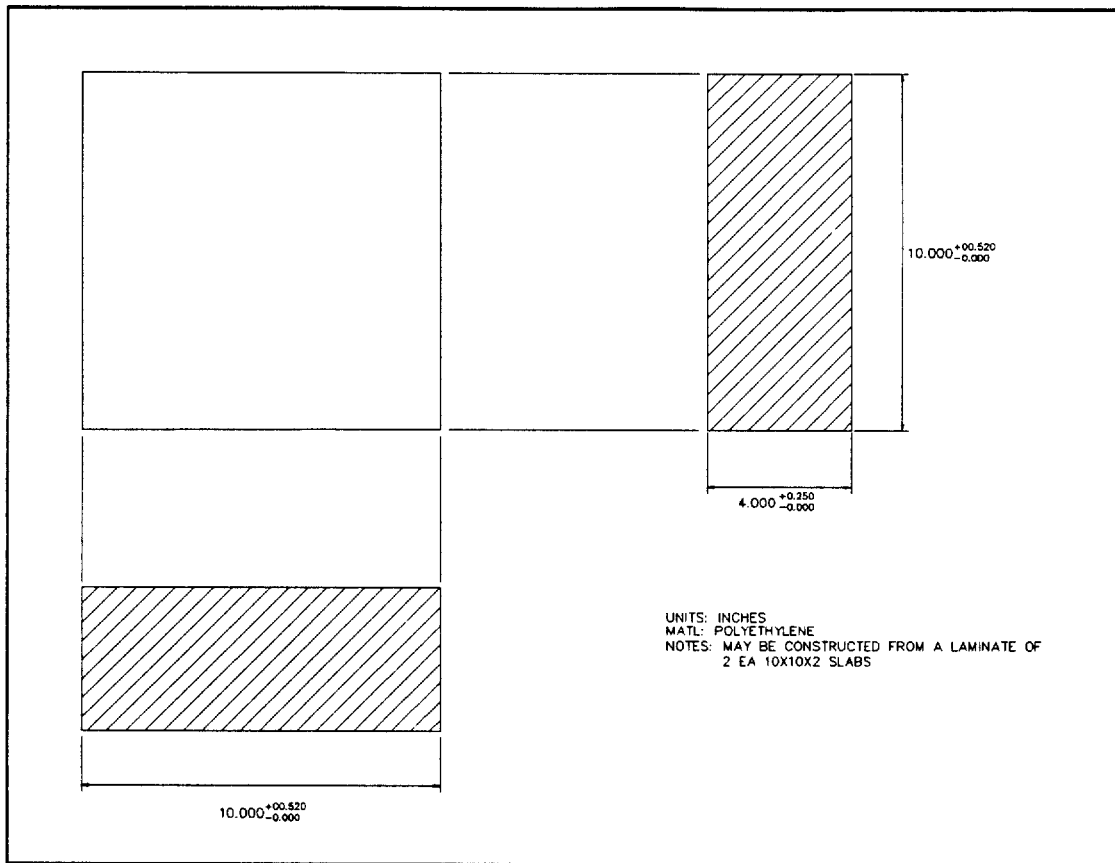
Bottom assembly of Cf-252 irradiation apparatus
